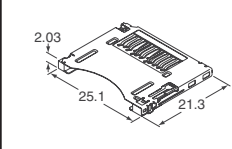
SD Memory Card Connector, Standard Mount Type
